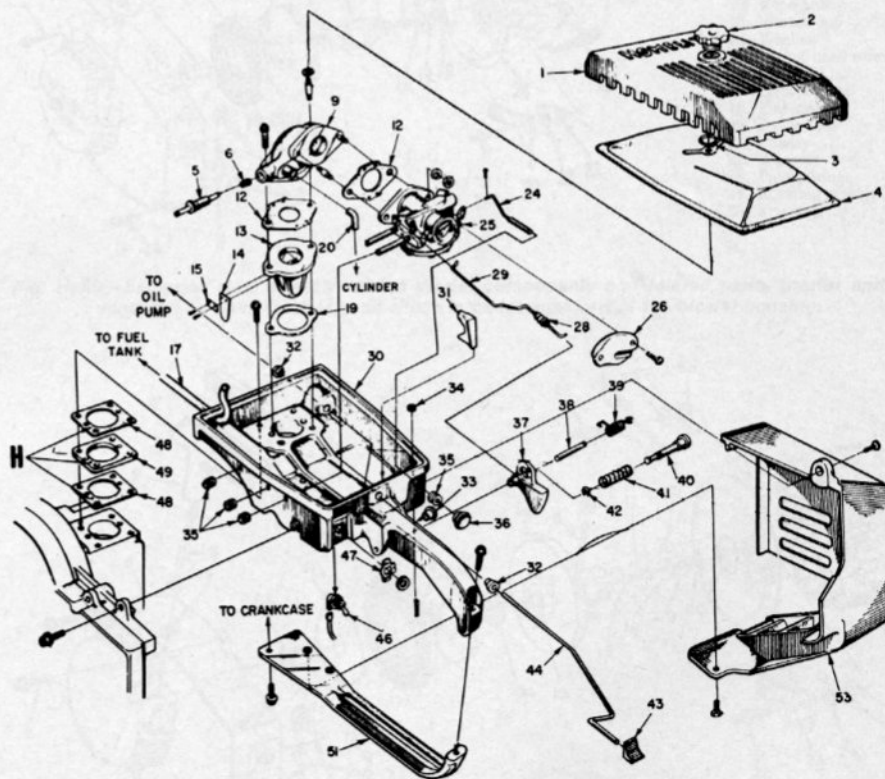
Exploded view of air box assembly for S1050 Auto and S1130G. Note idler air (speed) adjusting screw (5) in elbow (intake manifold) (9). Tube (20) is connected between intake manifold and cylinder transfer port. Align holes (H) in gaskets (48) and spacer (49) with holes in air box and crankcase as shown. Air filter element (4) has integral air box sealing gasket.
